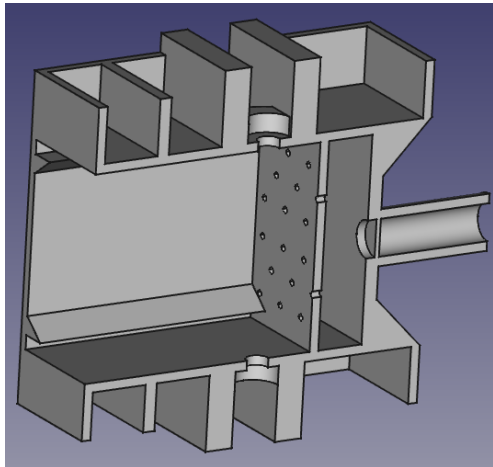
A sectional view of the GFPT-I, showing in detail the perforated bulkhead, magnets quarters, and discharge chamber dimensions.
